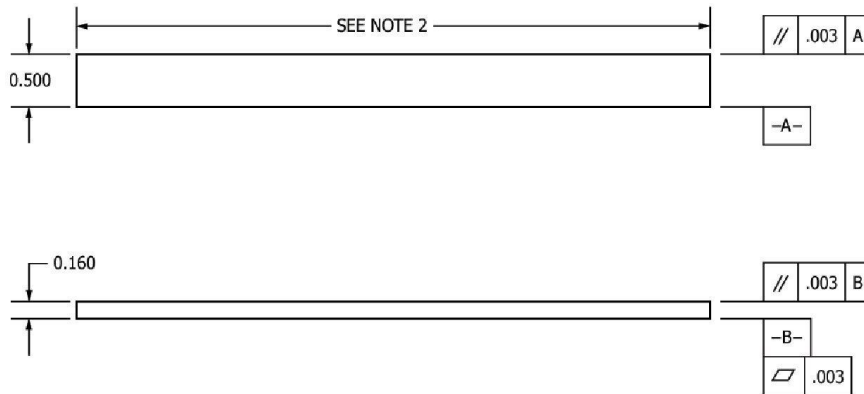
Standard Flexural Test Specimen Drawing (Inch-Pound)
